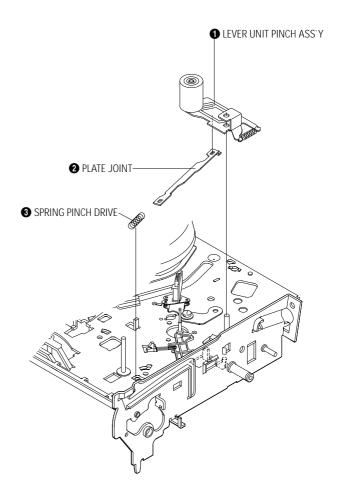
Lever Unit Pinch Ass'y, Plate Joint, Spring Pinch Drive Removal
